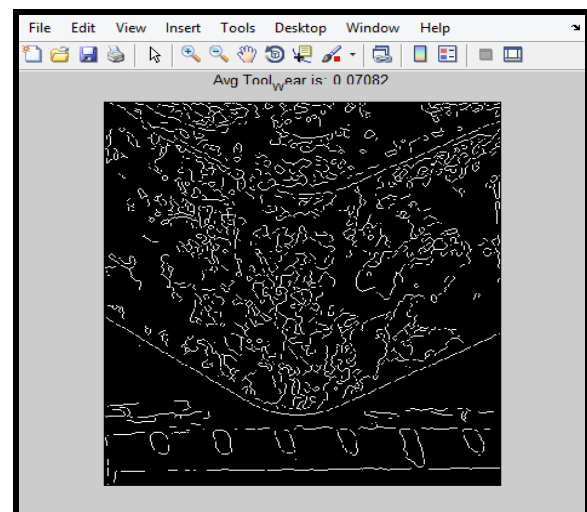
TOOL WEAR MEASUREMENT BY EDGE DETECTION TECHNIQUE
